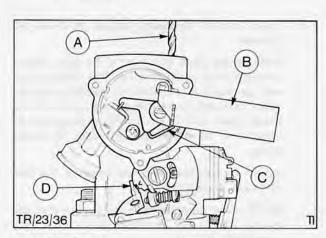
A — Twist drill B — Auto-choke pre-load tool (23 011)
